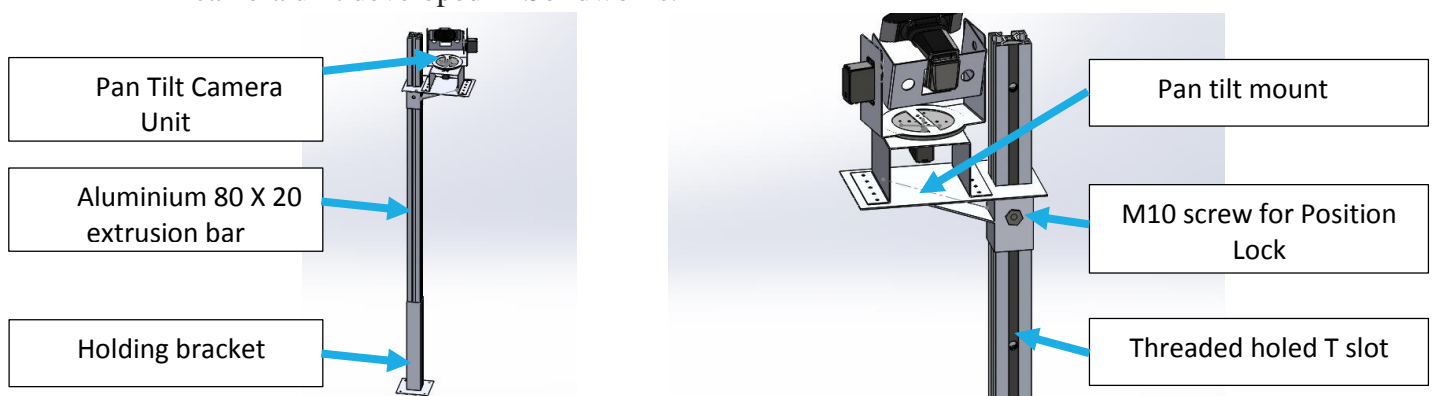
Elevation mechanism CAD model (Figure to the right indicates the Zoomed version)
